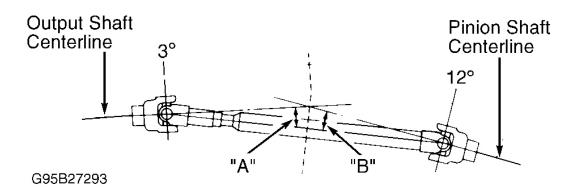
"Broken Back" Type Drive Shaft Alignment (Typical)
